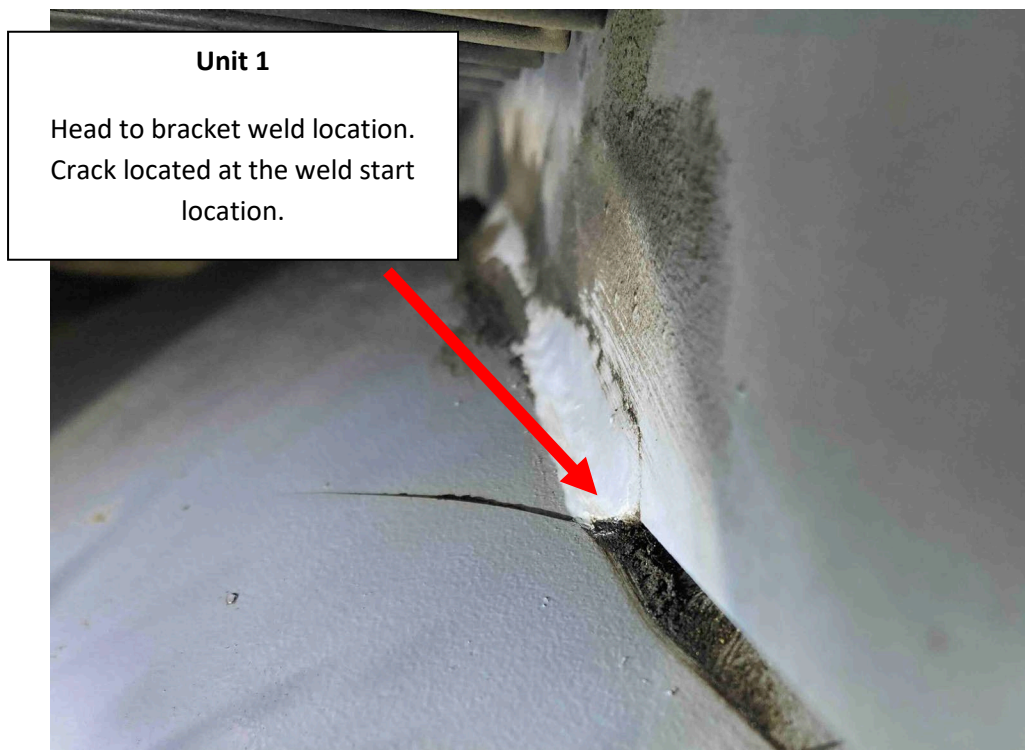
Pressure Vessel Head - Compressor Support Bracket
